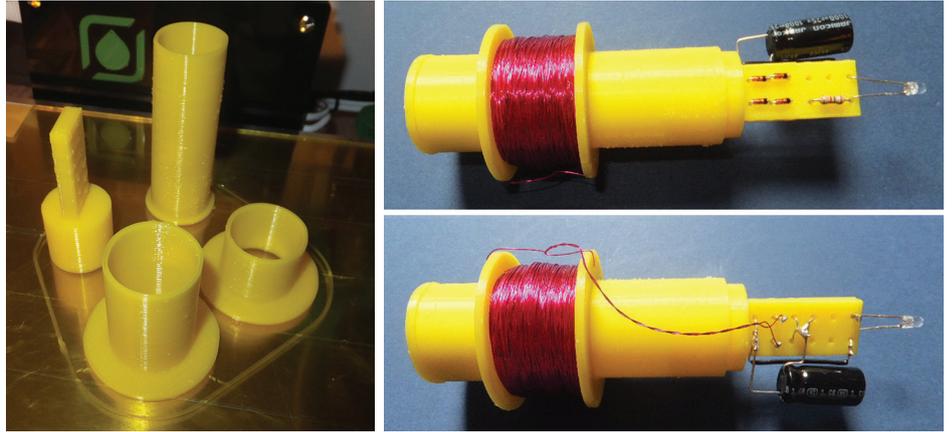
Left, four 3D printed parts for a shake-a-gen torch. Right, the completed torch.
